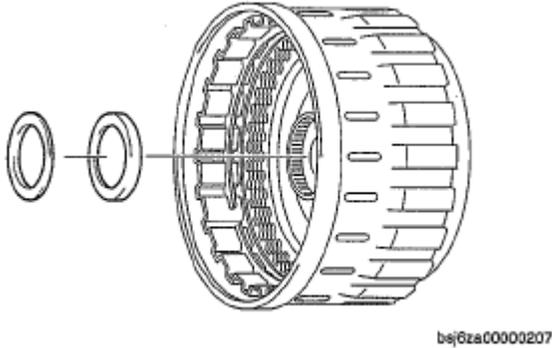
Identifying Bearing Race On C3 Clutch Piston Component
